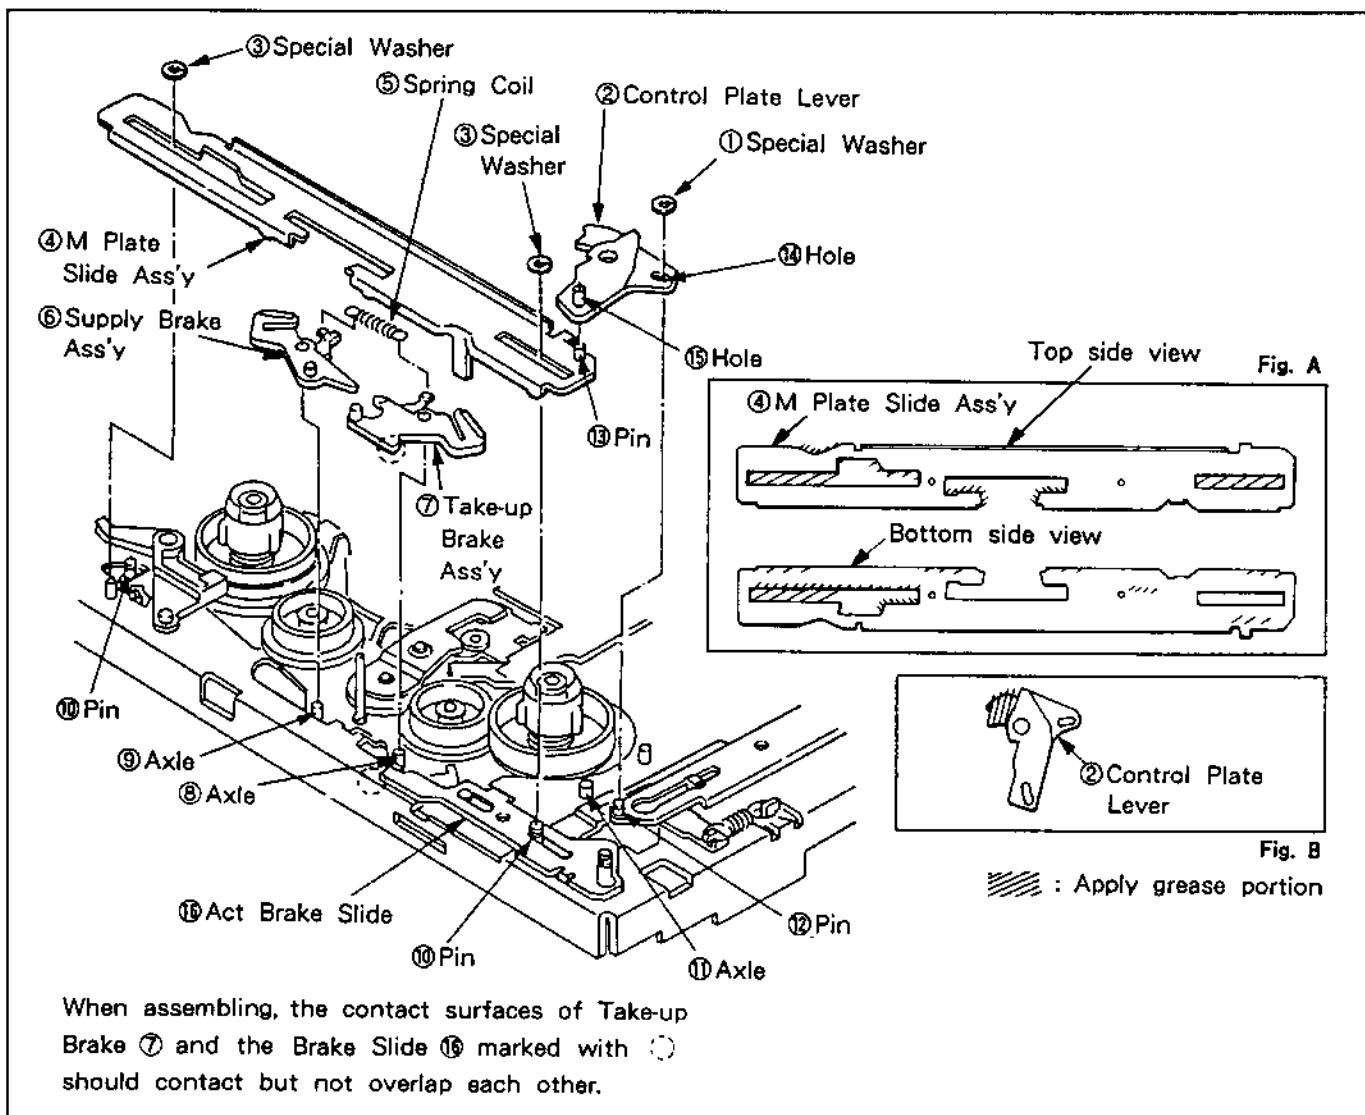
Supply Brake Ass'y & Take-up Brake Ass'y
